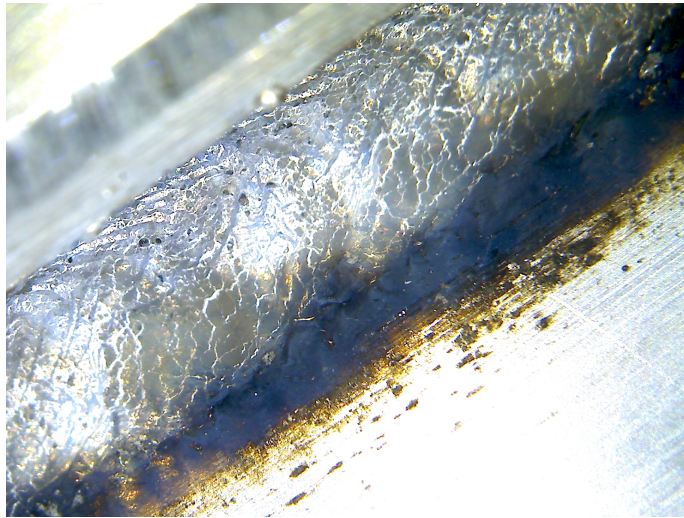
Picture of 6082-5754 LBW fillet weld.
